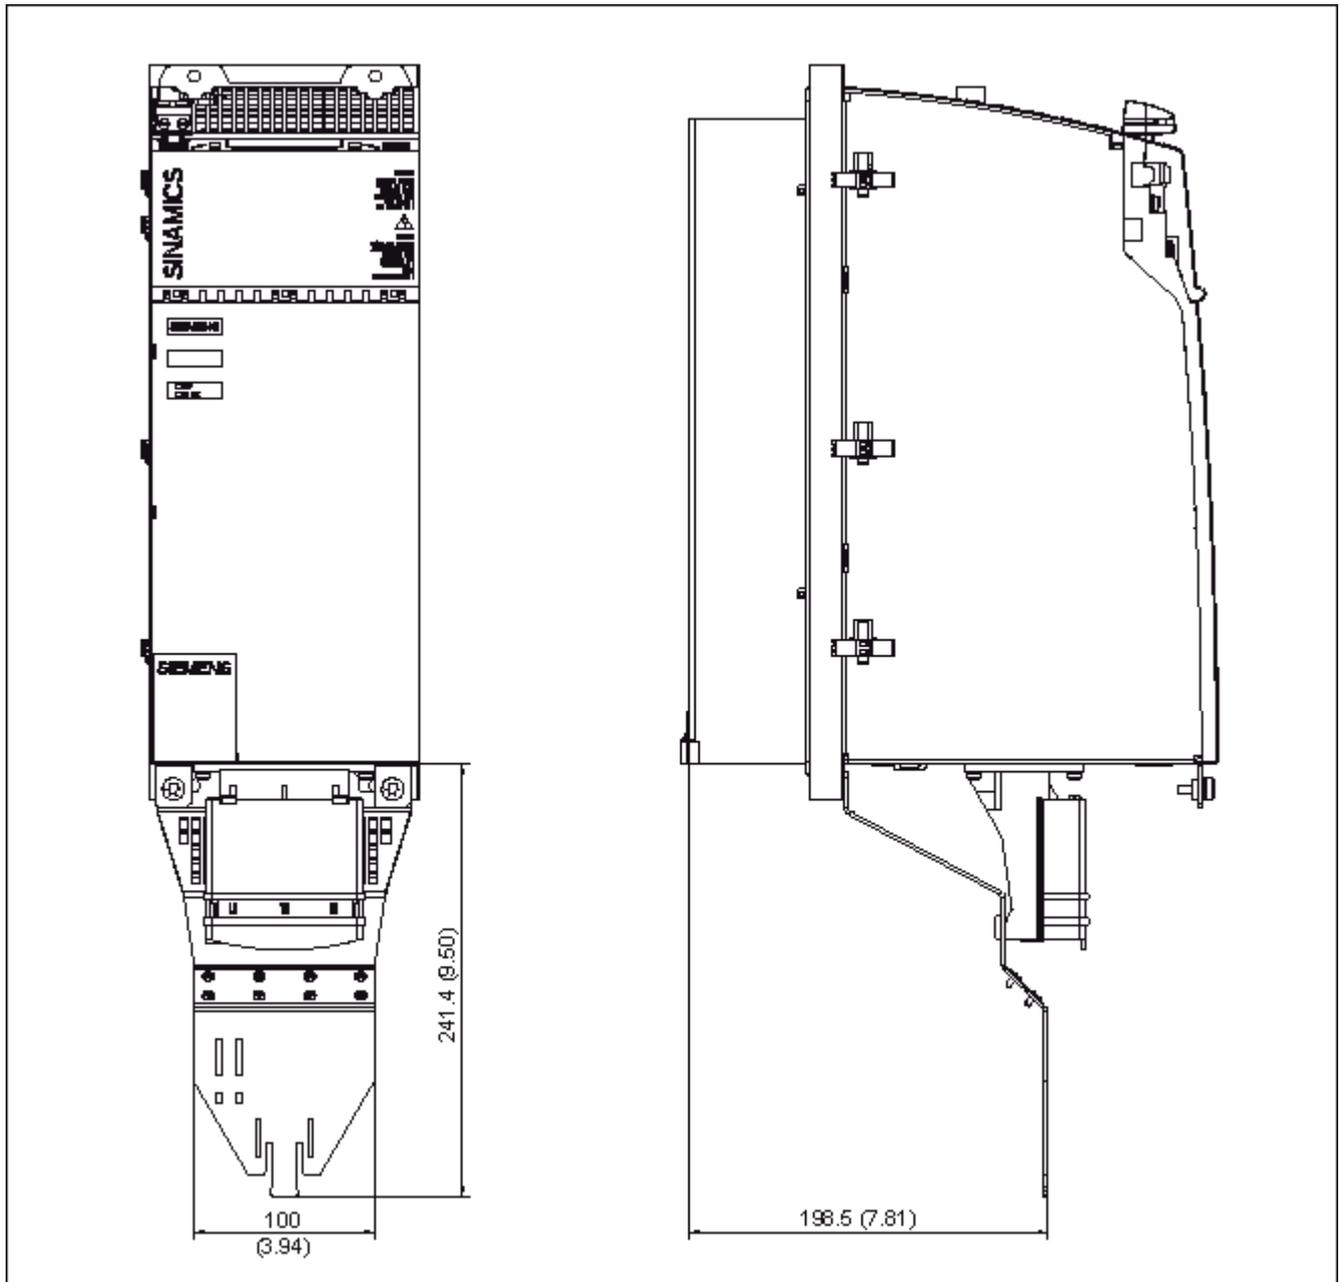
Dimension drawing of shield connecting plate on a 150 mm component with external air cooling, all dimensions in mm and (inches)
